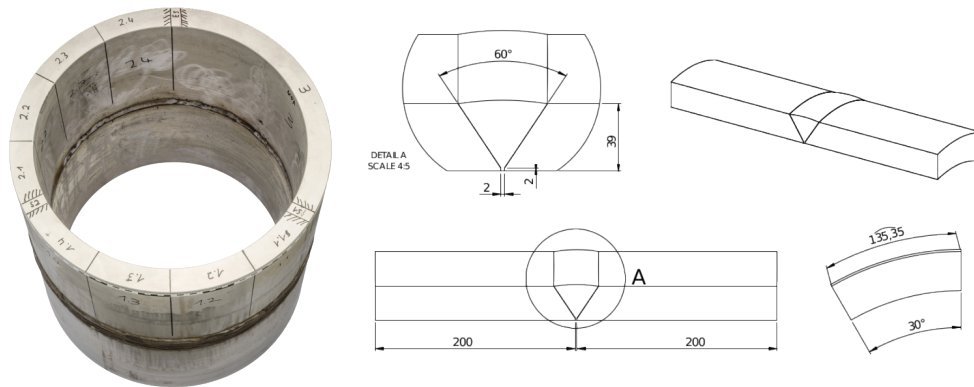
The ADVISE WP2 mock-up: a photograph and schematic drawings of a cut out section.
